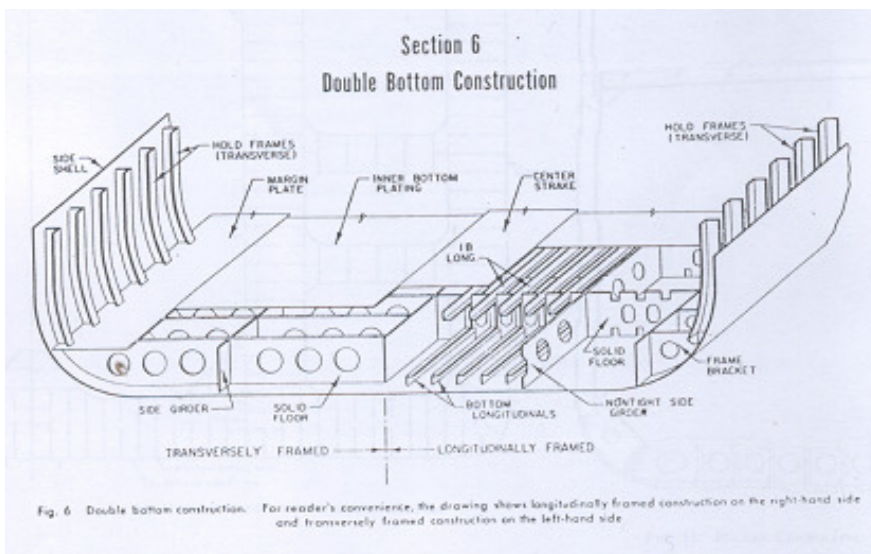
Double bottom construction. For reader's convenience, the drawing shows longitudinally framed construction on the right-hand side and transversely framed construction on the left-hand side.
